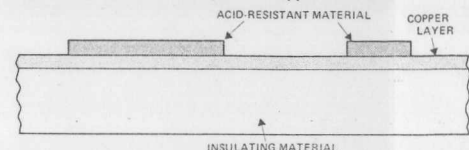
Cross-section of copper-clad board with acid-resistant material applied in the shape of the foil pattern.
